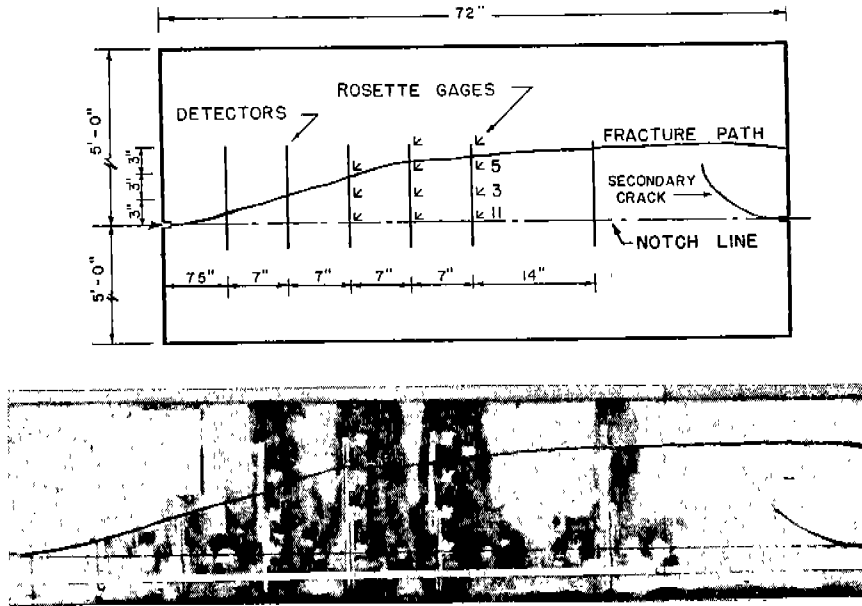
INSTRUMENTATION LAYOUT AND FRACTURE PATH -- TEST 39
